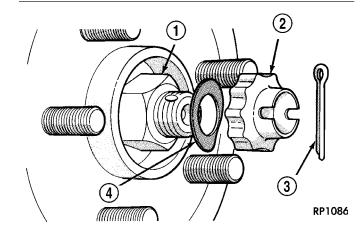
Halfshaft Hub Nut & Retaining Hardware
